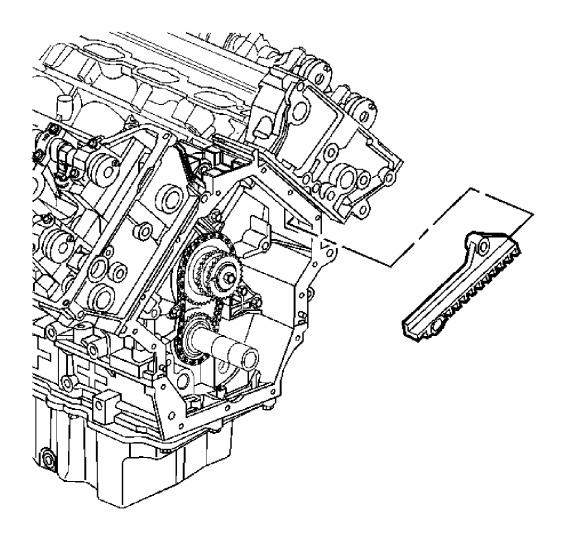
View Of Left Secondary Camshaft Drive Chain Guide Courtesy of GENERAL MOTORS CORP.
